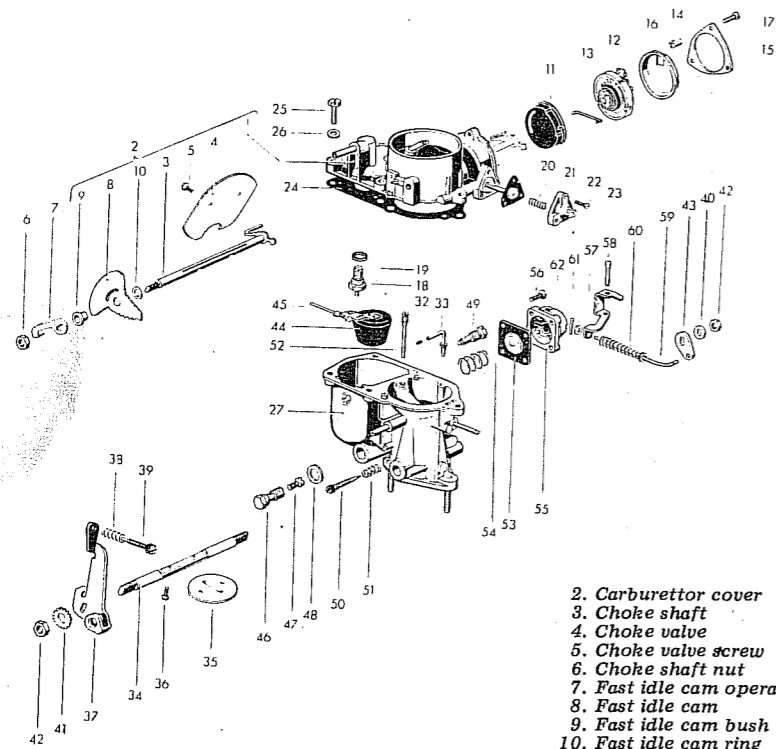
Exploded view of the Solex 28 PICT Carburettor.
